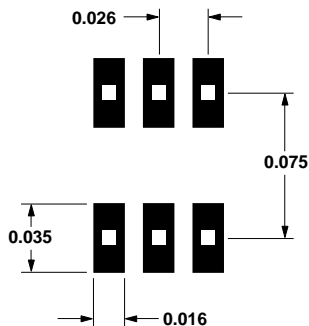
PCB Pad Layout for MGA-85563 Package (dimensions in inches).
